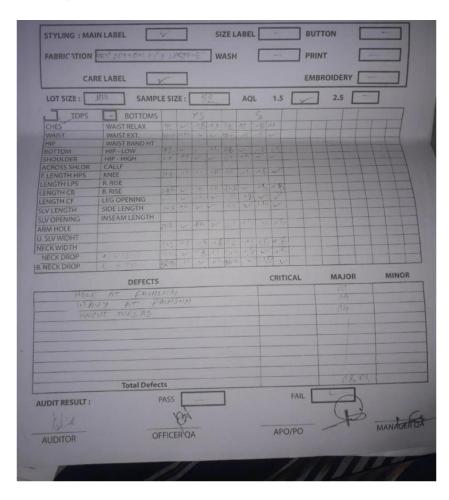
5: In-Line Sewing Inspection Report
